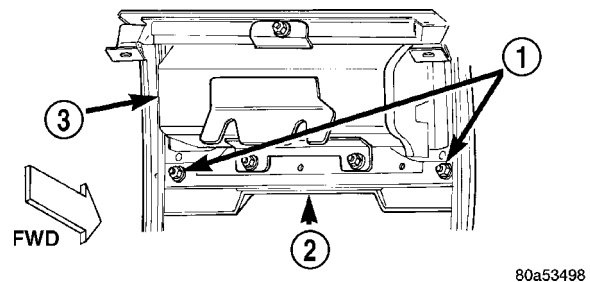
GRAB HANDLE REMOVE/INSTALL
